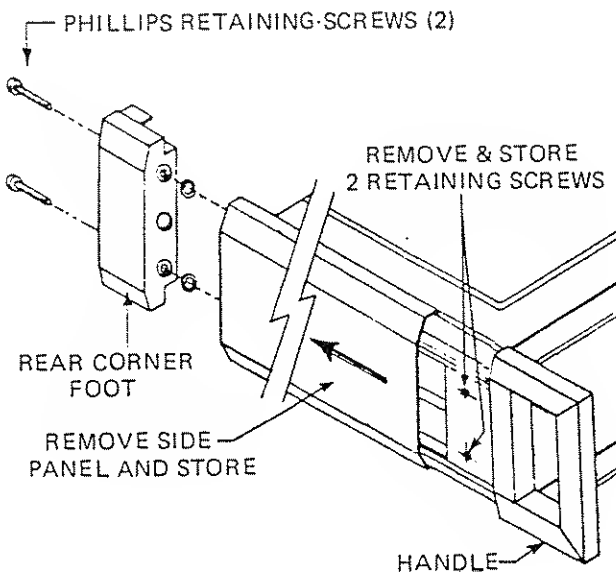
Rear Corner Foot, Side Panel, and Handle Detail
